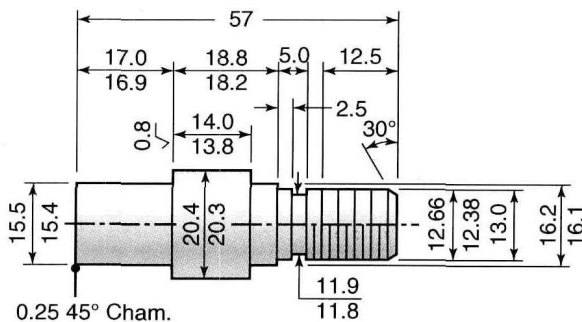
A machined and threaded part, showing various dimensions and tolerances; all dimensions are in mm. Note that some tolerances are only a few tenths of a mm.
